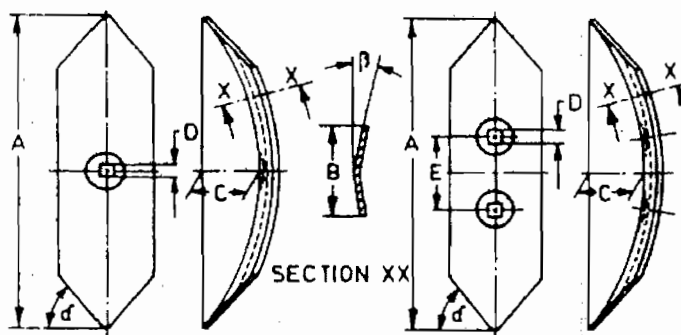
Dimensions of Reversible Shovel as per Indian Standard (mm)
